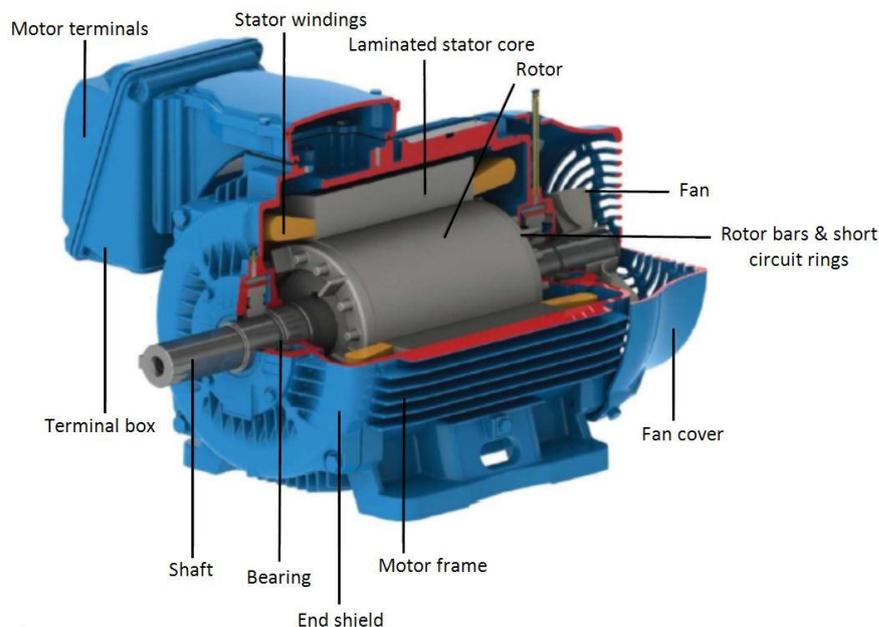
Three phase AC motor components (Electrical Engineering Tool Box, 2016)
